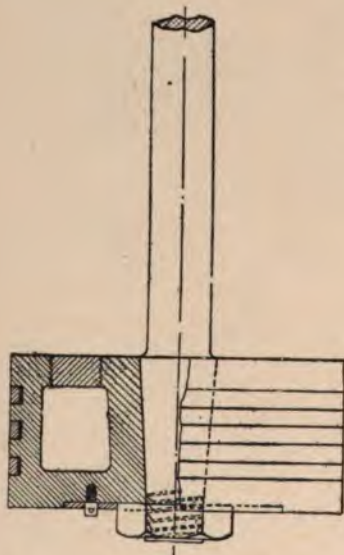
Solid Piston, with Ramsbottom Spring Rings.
